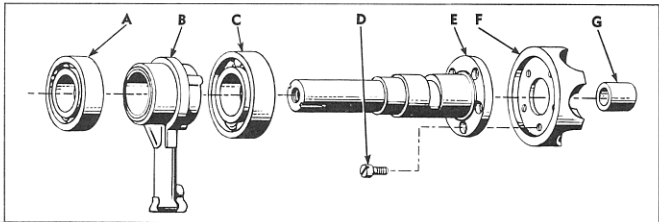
POWER INPUT SHAFT ASSEMBLY
